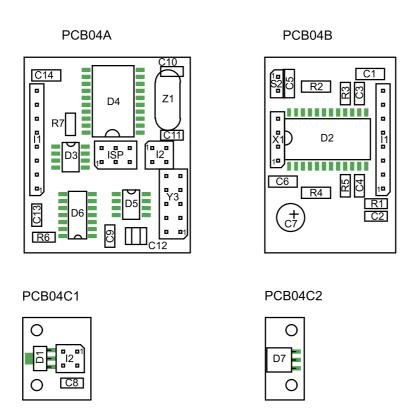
Printed circuit boards for the Stepper motor controller top view. Placement of the components is shown. Designations correspond to circuit diagrams in Fig. 1.13 and Fig. 1.14
